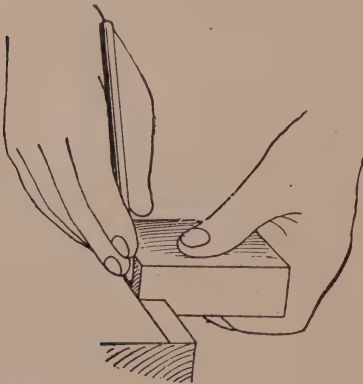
Drawing Lines for Chamfering, using Chamfering Gauge
